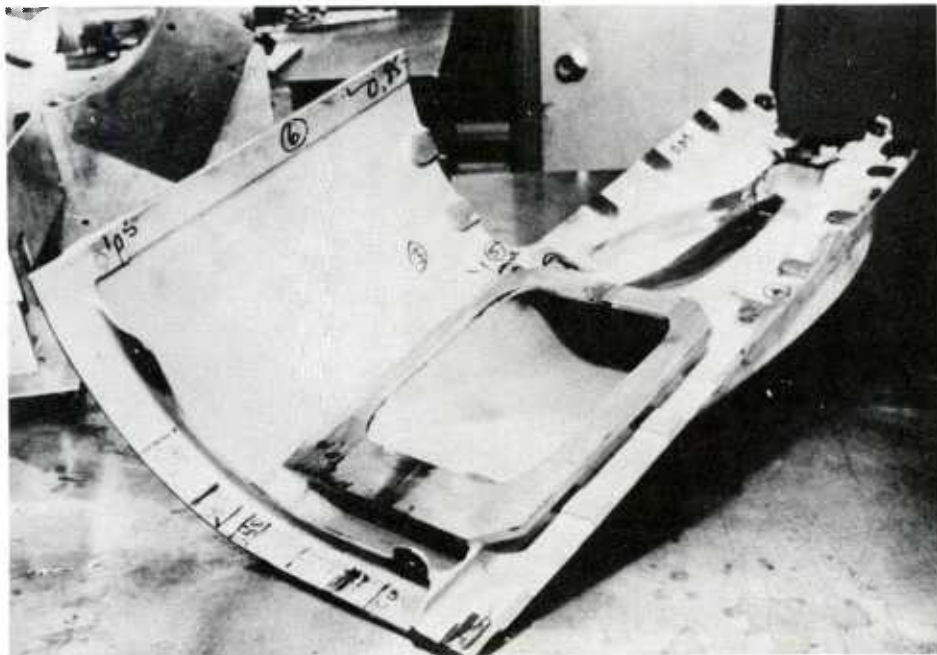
CASTING IN A357 ALUMINIUM ALLOY
